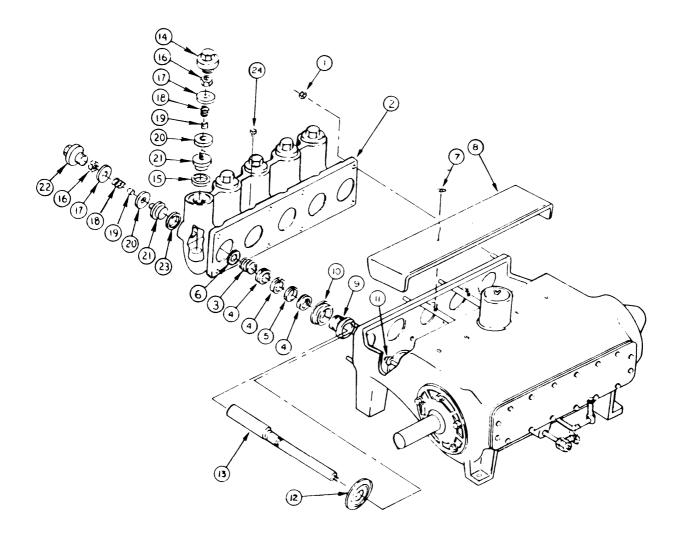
R. O. Pump Suction/Discharge Assembly
